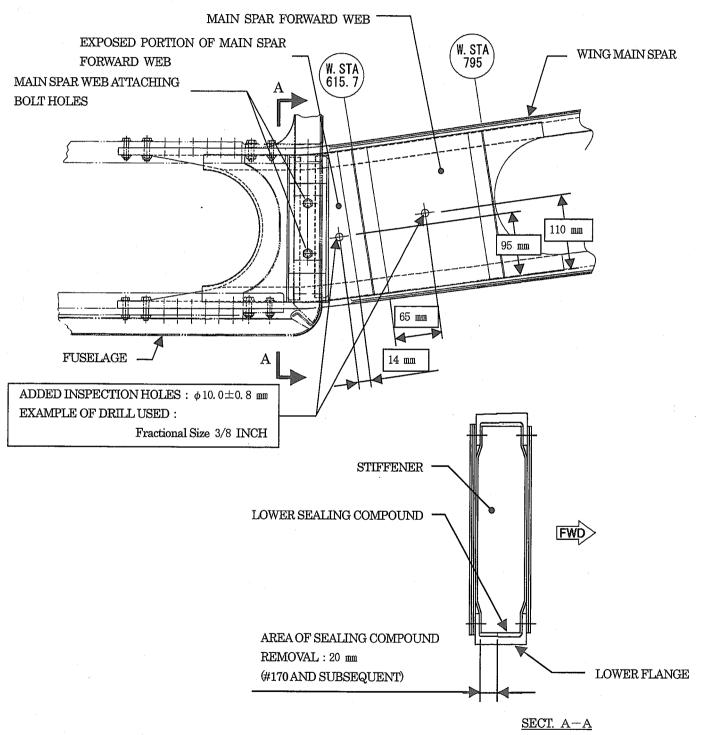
Addition of Inspection Holes and Partial Removal of Sealing Compound
